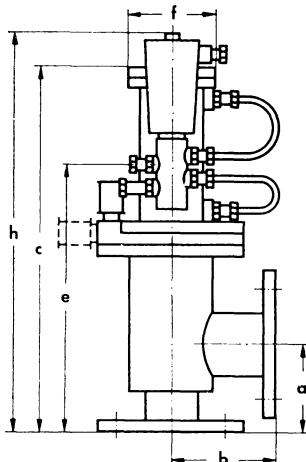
Dimensions of pneumatic valves supplied by Leybold⁷⁶² (Table 6.20)
